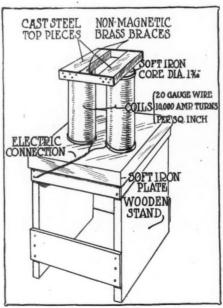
APPARATUS FOR RECHARGING MAGNETS
